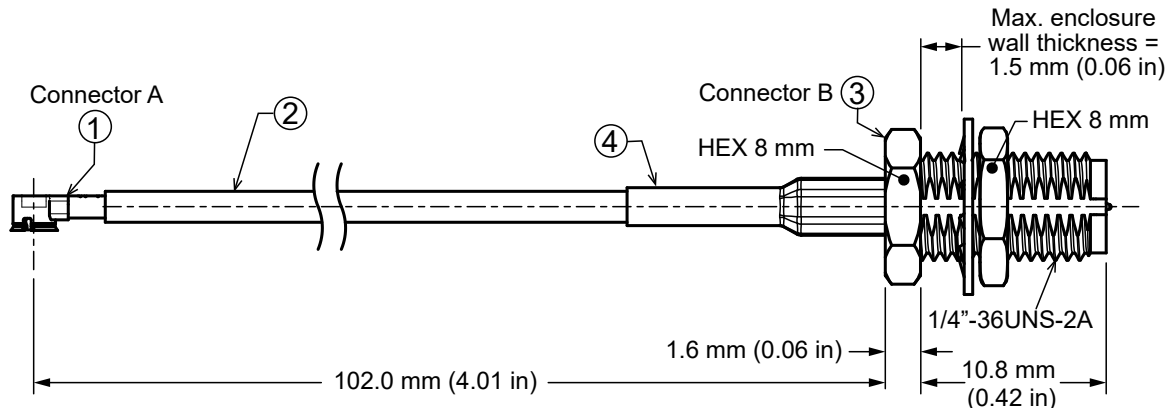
Product Dimensions for the CSB-RGFB-102-UFFR Cable Assembly
